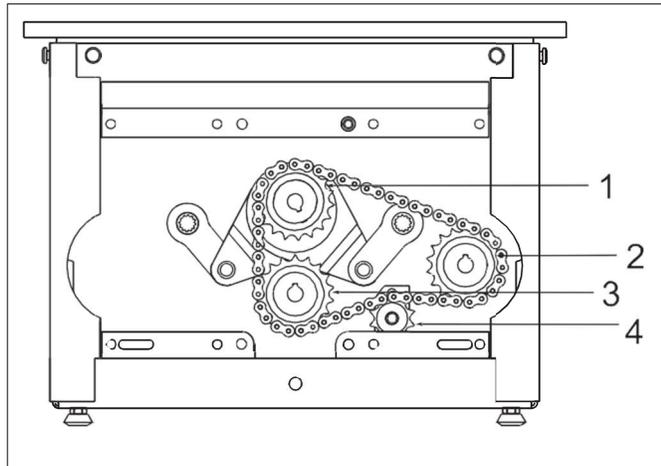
300 & 600 Single Drive Sprocket Configuration
